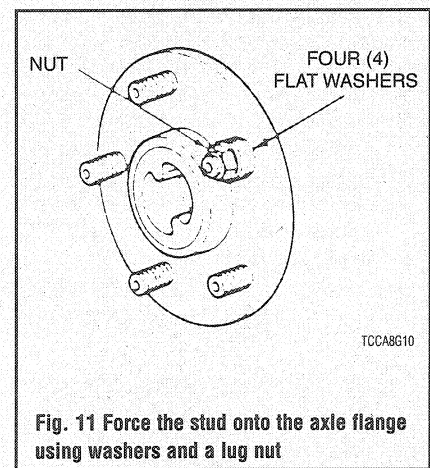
Force the stud onto the axle flange using washers and a lug nut
